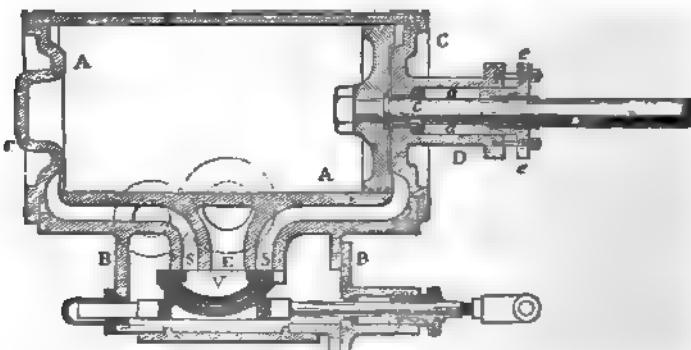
Section through a Steam Cylinder and Valve Chest, showing parts. A is the cylinder, B, the steam chest; C and C, the cylinder heads; D, the stuffing box; e and e, the packing gland; c, the piston rod. E, the exhaust port; S and S, the steam ports; V, the slide valve; e, e, the packing gland, held in place by screws in this engine.
